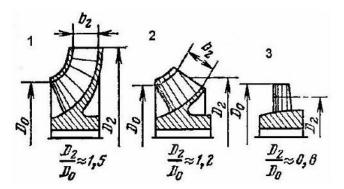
Types of high-speed pump working impellers: 1 - High-speed impeller, $n_s = 150 \div 300$; 2 - diagonal impeller, $n_s = 300 \div 600$; 3 - axial impeller, $n_s = 600 \div 1200$
